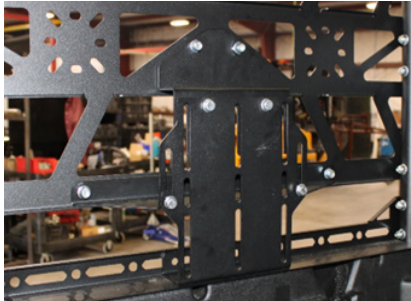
Assemble Spare Tire Mount using 13mm Wrench and 13mm Socket
